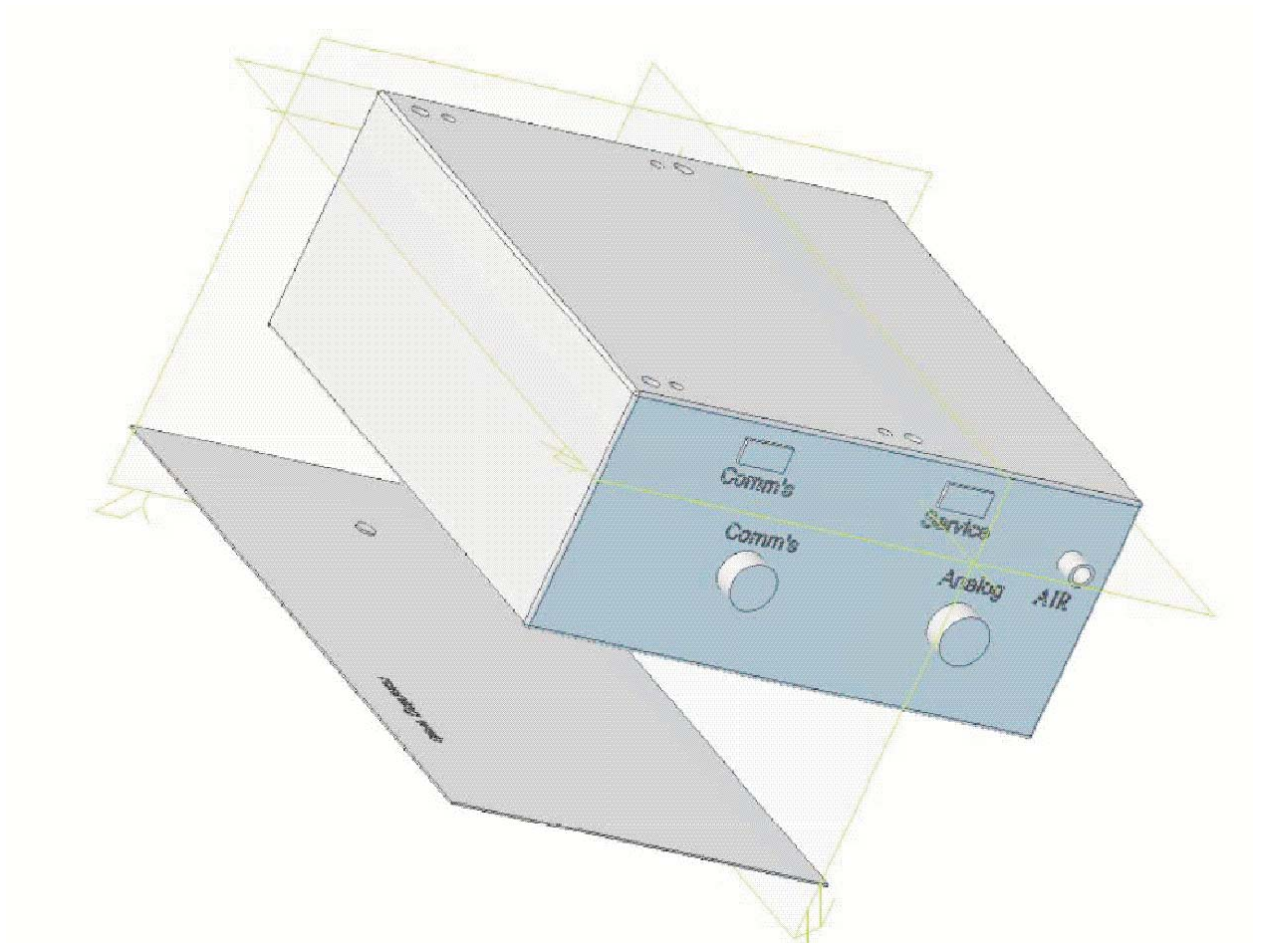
Mechanical assembly of FrontColour10 Colour meter (not to scale) relative to the surface below it to be measured
